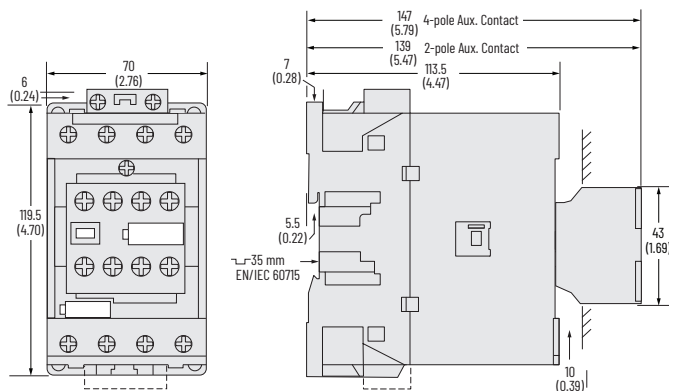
100-E40...100-E52 4-Pole Contactors with Side-mounted Auxiliary Contact
